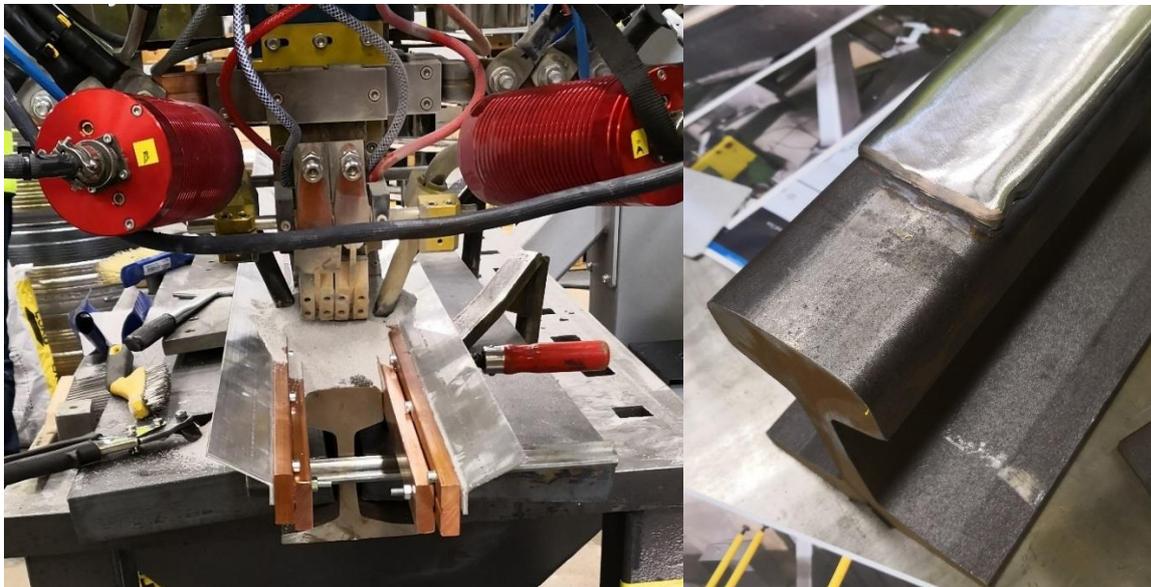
, (left) weld setup for ESC welding, (right) finished weld.
